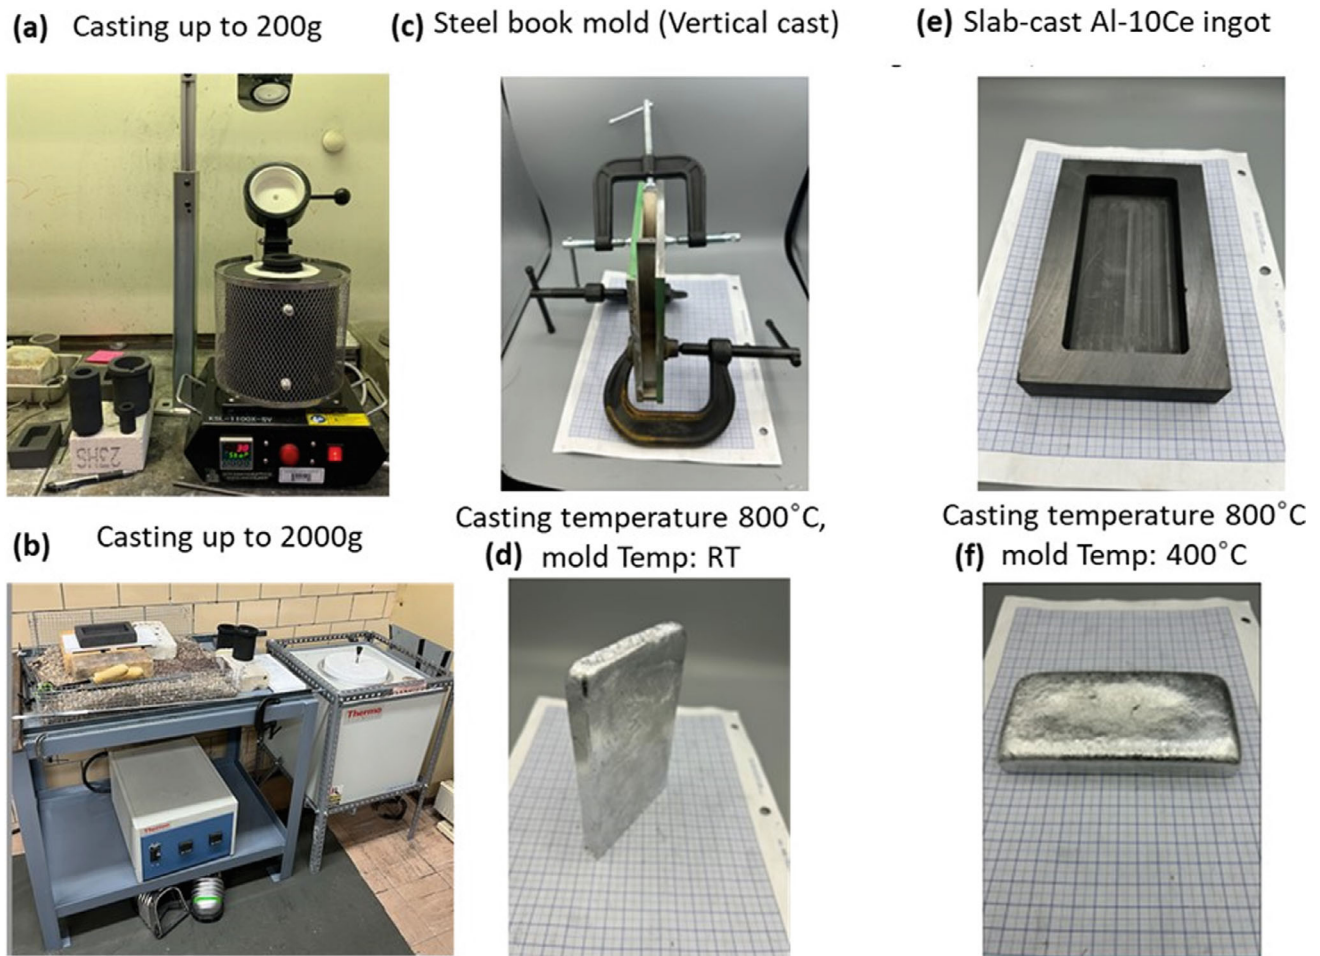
Casting devices used for a samples up to 200 g and b samples up to 2000 g. Two different mold geometries have been used in the present work: c steel book mold setup, and e slab cast mold setup.
